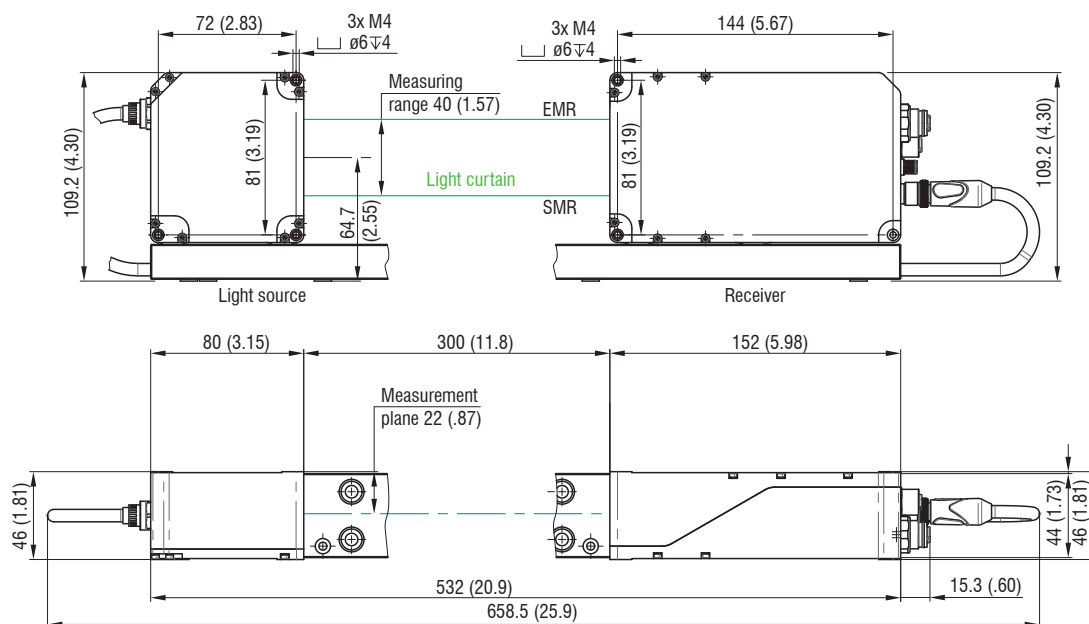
Dimensional Drawing of Light Source and Receiver, Dimensions Stated in mm
